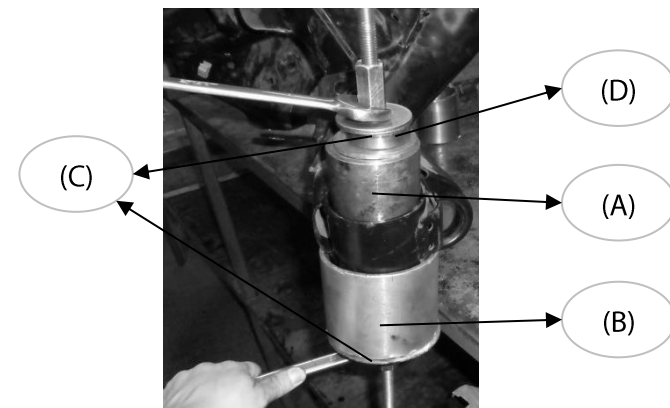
Tools setup for removing factory bushes (Refer to point 2).
